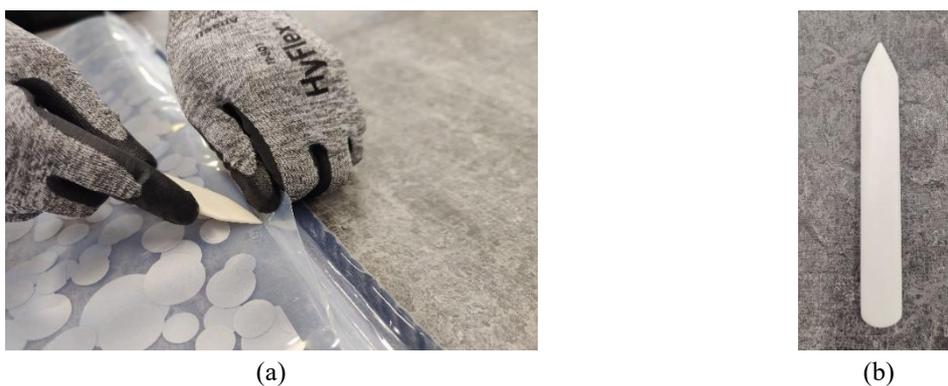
Peel test with tool; (a) conduction at an edge weld seam; (b) recommended tool: folding bone
